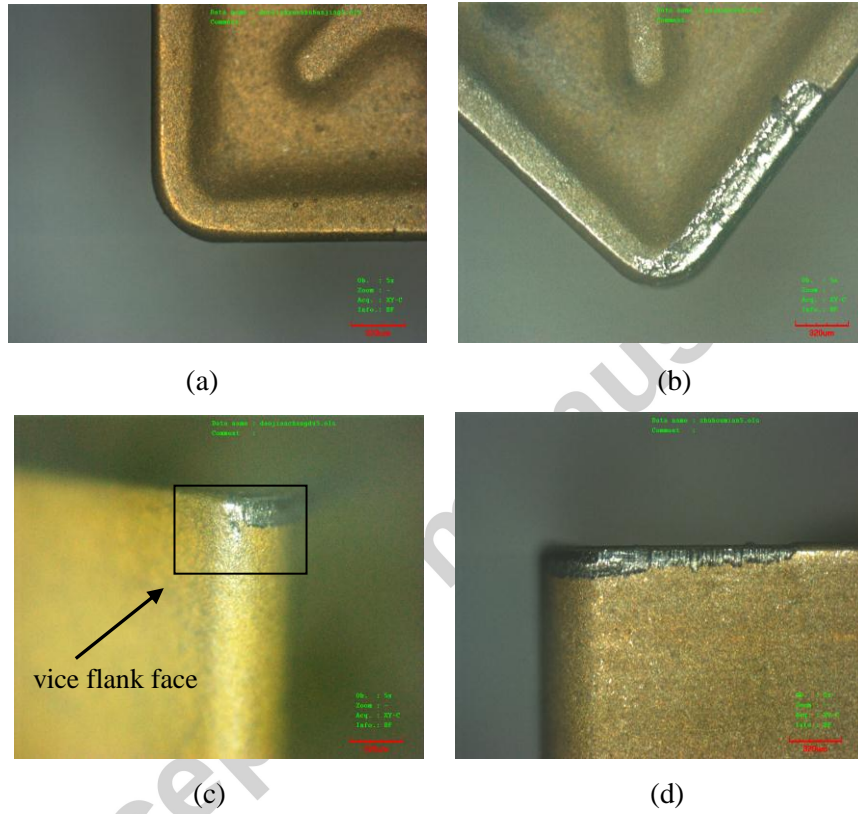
Photographs of tool wear (a) The tool before using; (b) The rake face wear; (c) The wear of the contact parts of the tool tip and workpiece; (d) The flank wear.
